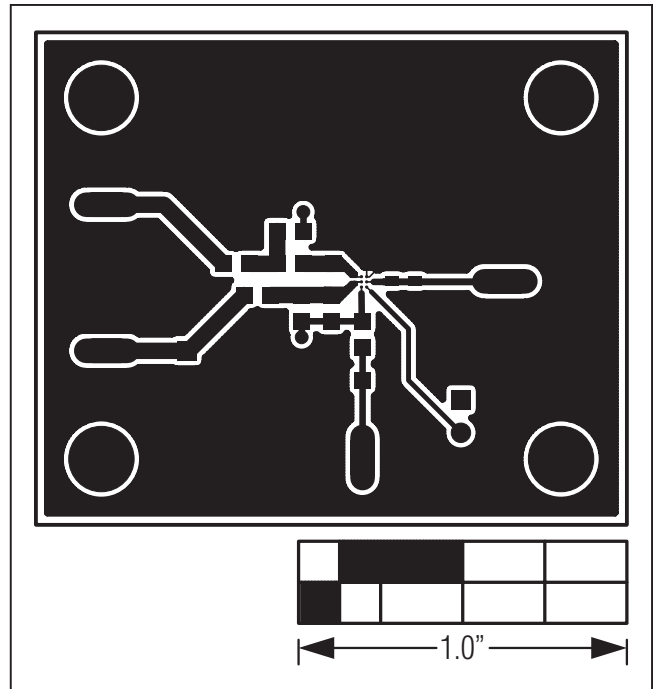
MAX44265 EV Kit PCB Layout—Component Side
